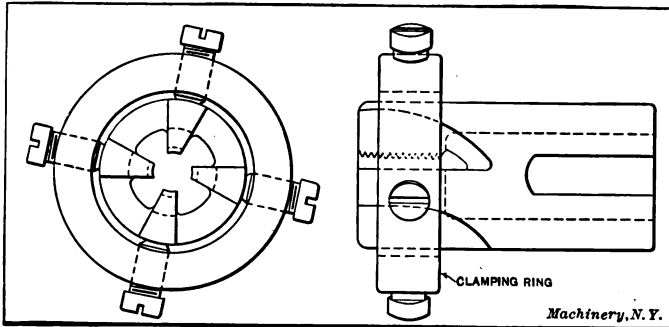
Spring Screw Threading Die and Adjusting Ring
